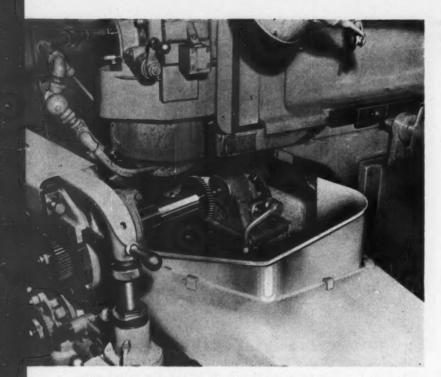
The generating principle of this gear grinder is similar to that of the hobbing process.
